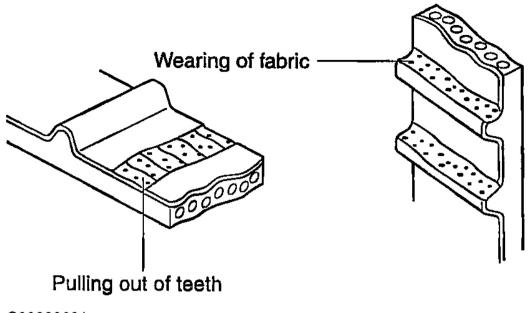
Testing Timing Belt For Abnormal Tooth Wear Courtesy of KIA MOTORS AMERICA, INC.
